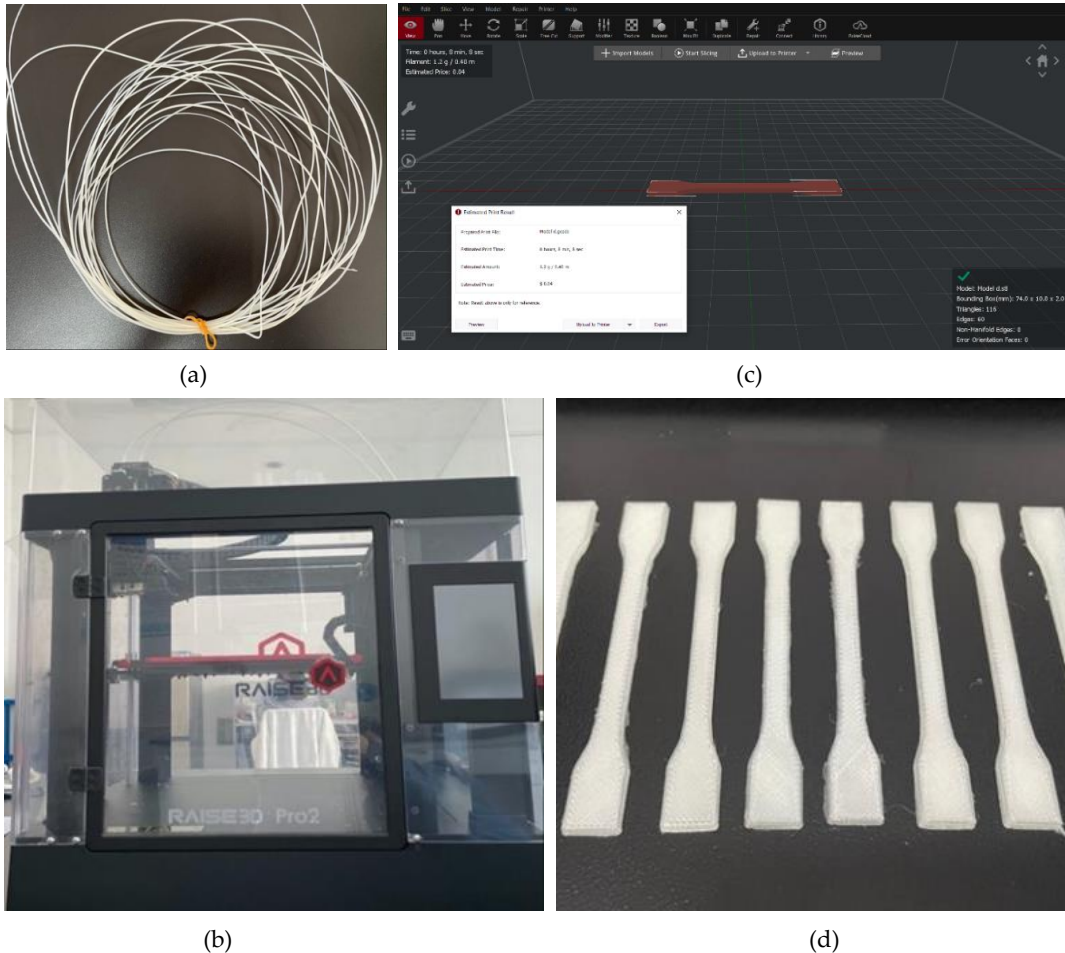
Pure nylon tensile spline 3D printing: (a) Pure nylon wire, (b) 3D printer, (c) Specimen modelling process in CAD software, (d) Pure nylon-6 tensile parts
